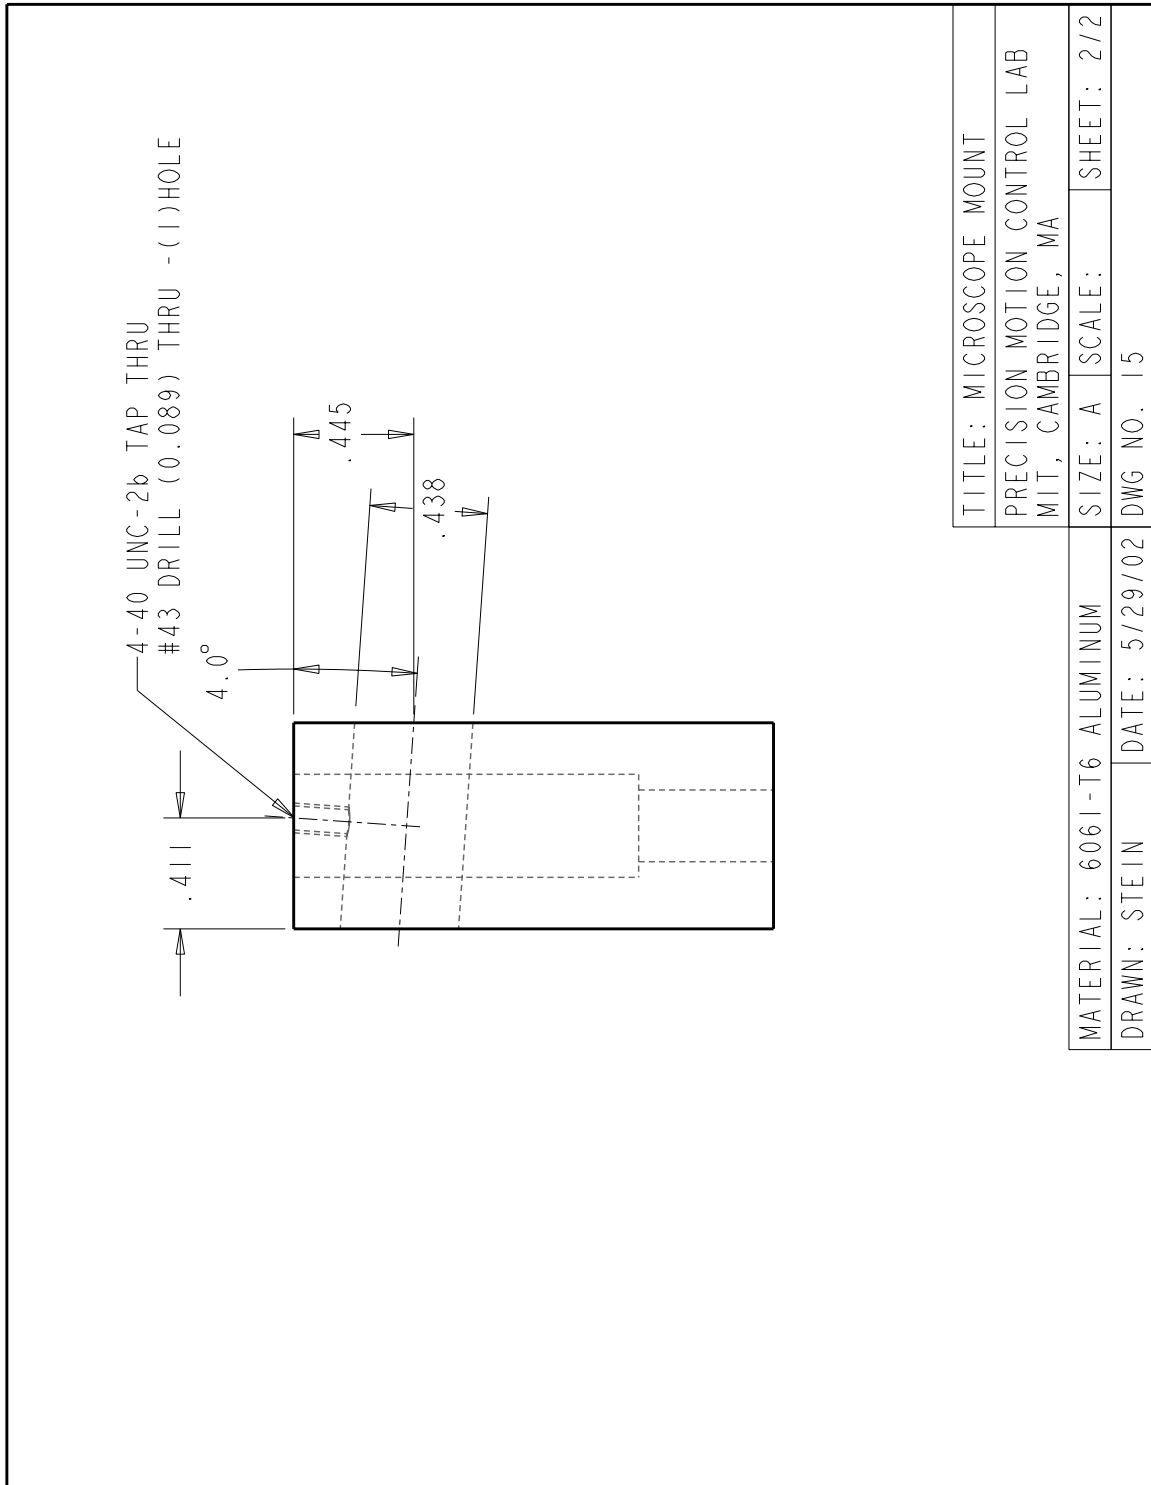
Coarse approach viewer mount mechanical drawing, sheet 2.
